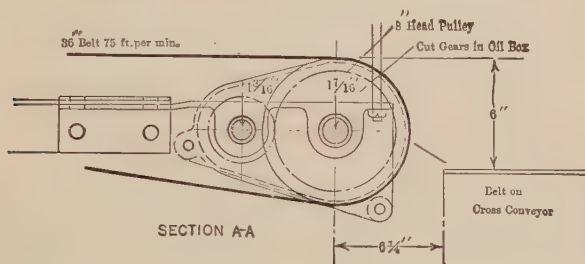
Transfer Between Two Package Conveyors. (Link-Belt Company.)
